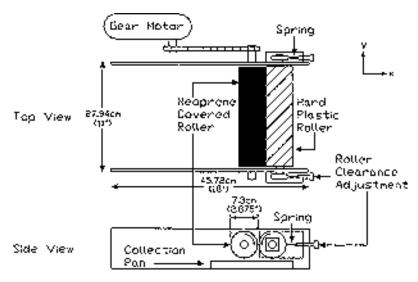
Roller mechanism used for measuring the extent of fissuring in milled rice kernels.
